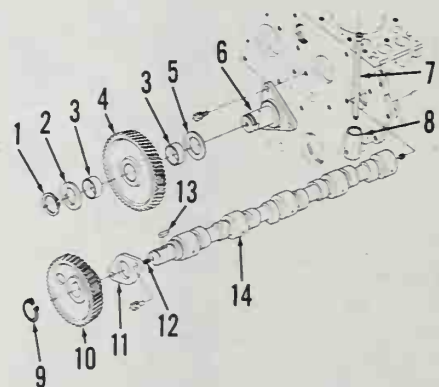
Exploded view of camshaft and idler gear assemblies.
